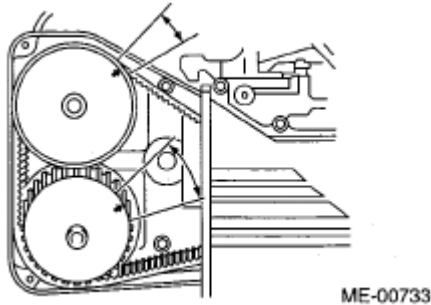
Identifying Arrow Mark On Camshaft Sprocket
